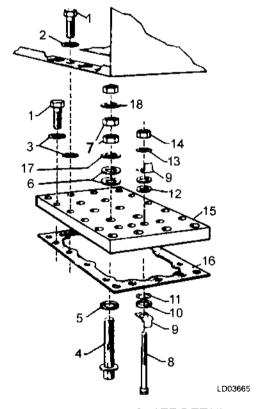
MOTOR TERMINAL PLATE DETAIL
